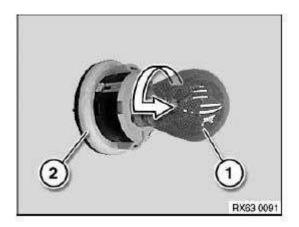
Identifying Front Direction Indicator Bulb Courtesy of BMW OF NORTH AMERICA, INC.
